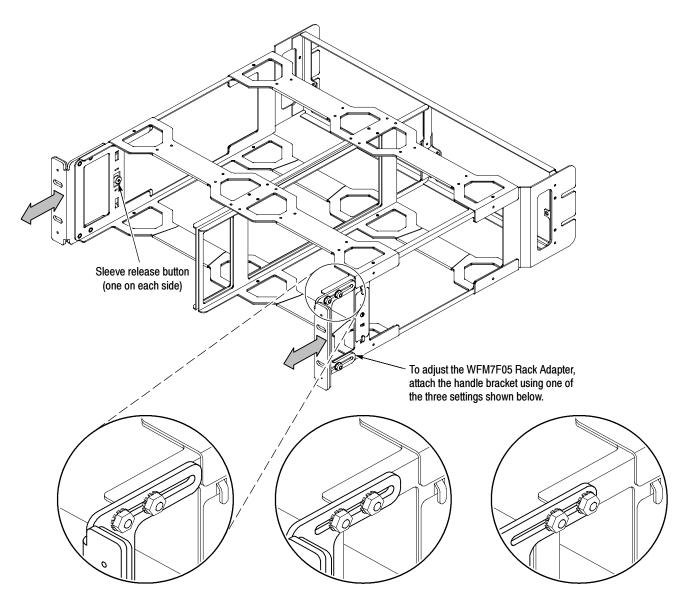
Adjusting the position of the WFM7F05 rack adapter handles
